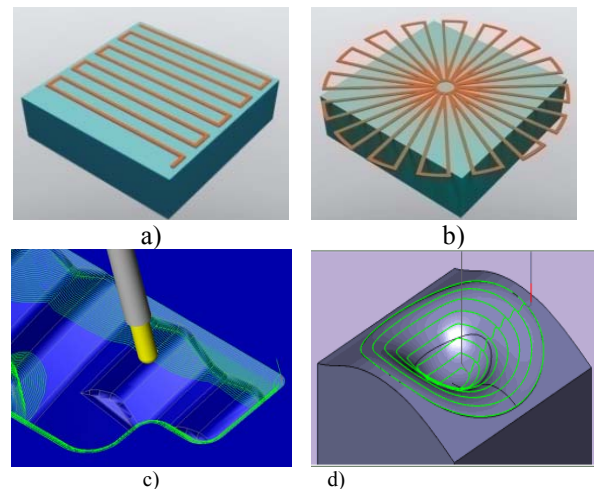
Examples of finishing strategies; a) Raster finish milling [2], b) Radial milling [2], c) 3D offset milling [10], d) Finish milling with constant height along the “Z” axis [9]
